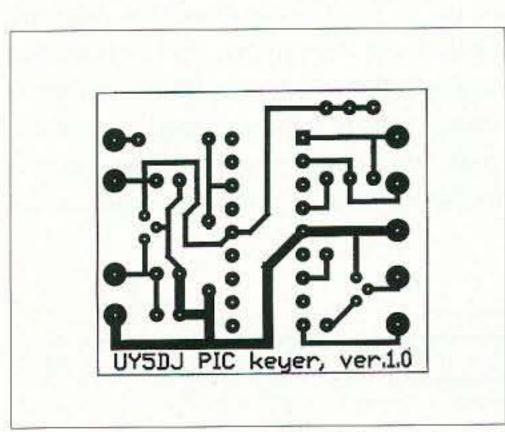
(b). PIC keyer printed circuit board, soldering side.
